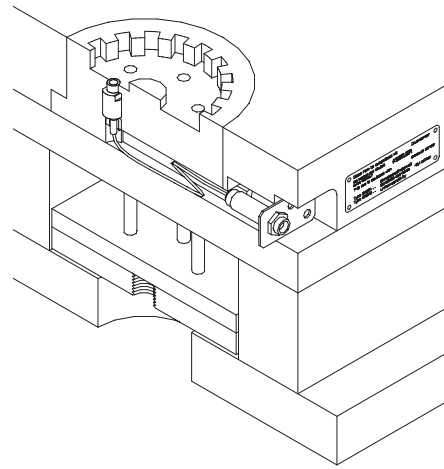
Sensor, cable, mounting plate (Art. No. 3.520.328) and identification label (Art. No. 3.520.842)
